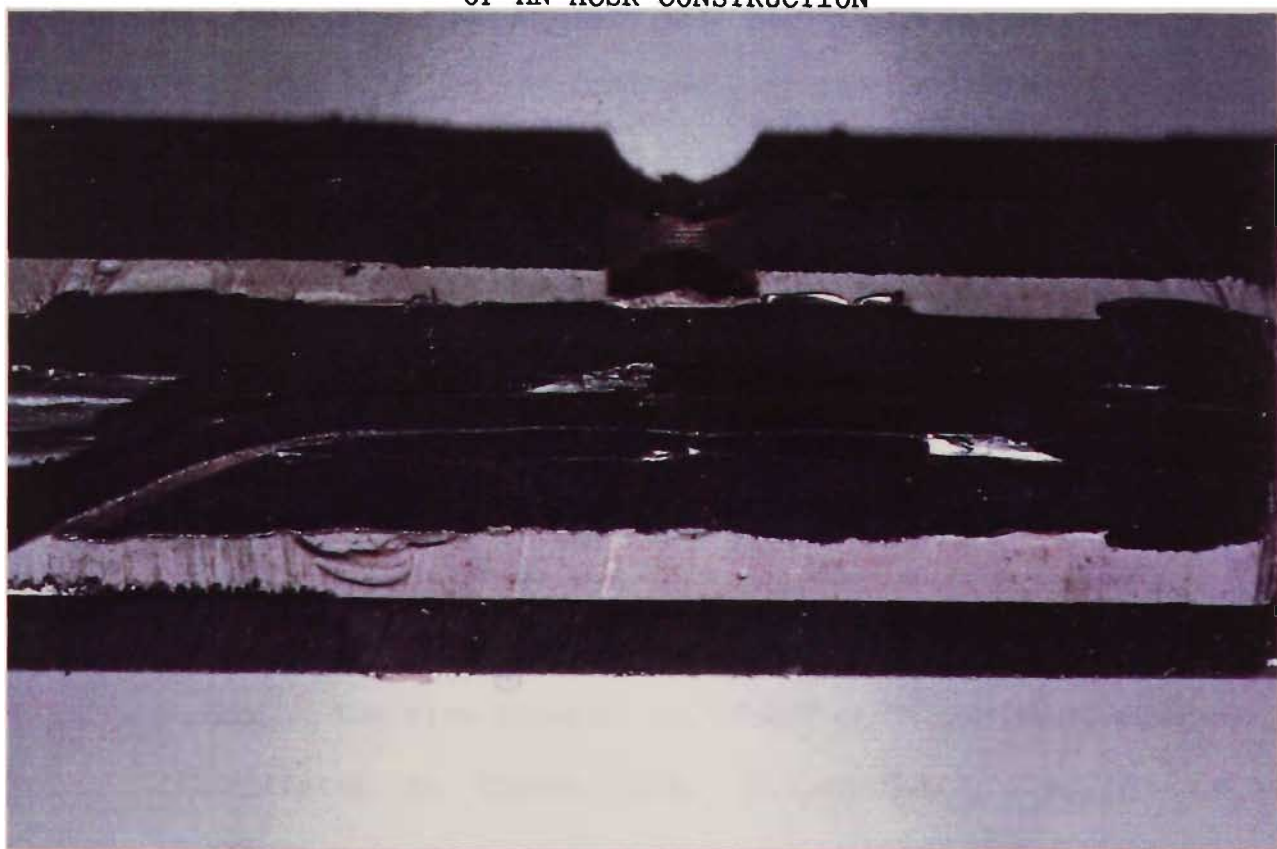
SECTION OF EPOXY/COMPRESSION TERMINATION
